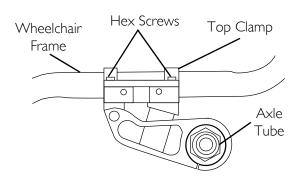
Adjusting Wheelbase Length (Adjusting Center of Gravity)
